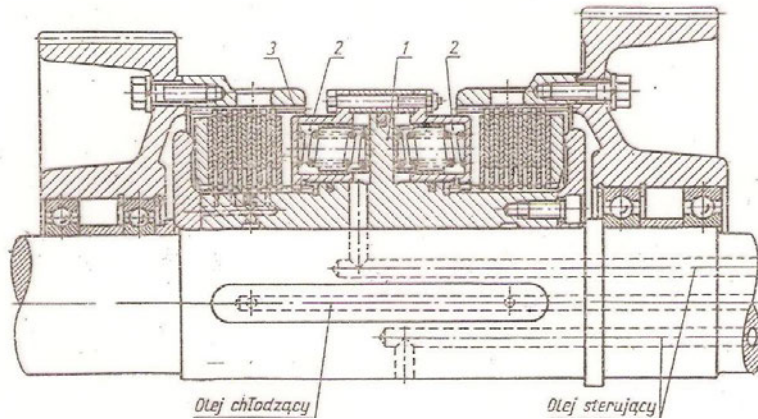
A machine tool friction clutch [10]. Legend: olej chłodzący = cooling oil; olej sterujący = control oil
